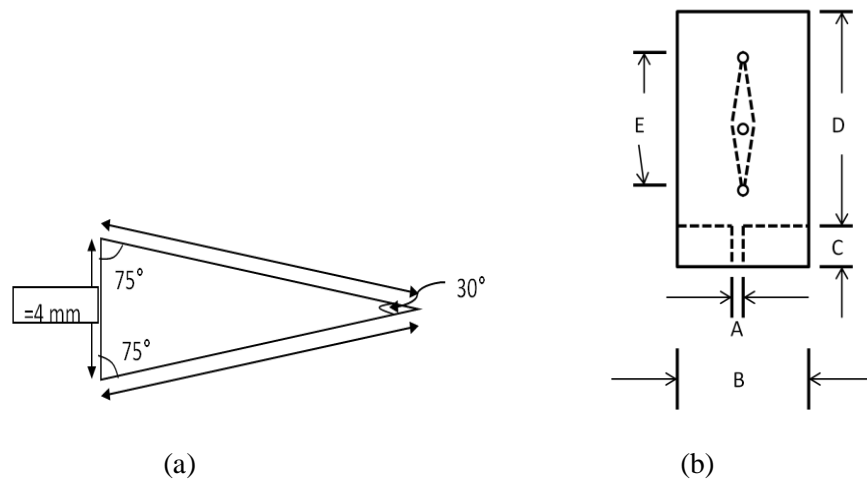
, (a) dimensions of a triangle used as a building block of the mold for a tapered channel in PDMS upper cladding (cut to size by CO₂ laser) (b) top view of the revised design-III with tapered channel
